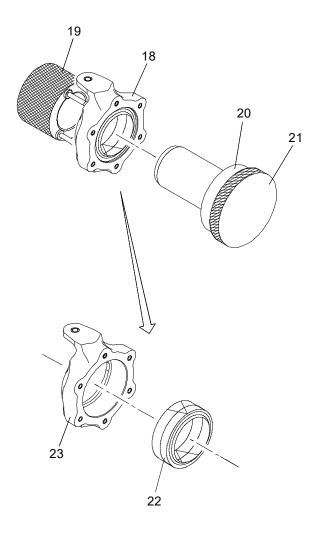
(sheet 3 of 4). Housing and slider group - Disassemble procedure (Sleeve assy P/N 109G6430A03)
